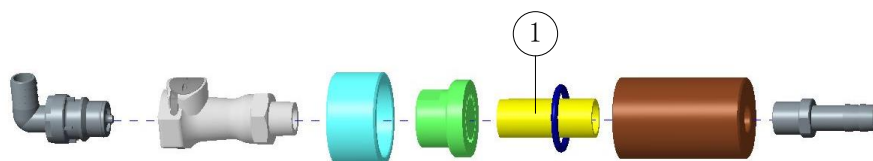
Exploded view of Water tank assembly(After EBJ650)
